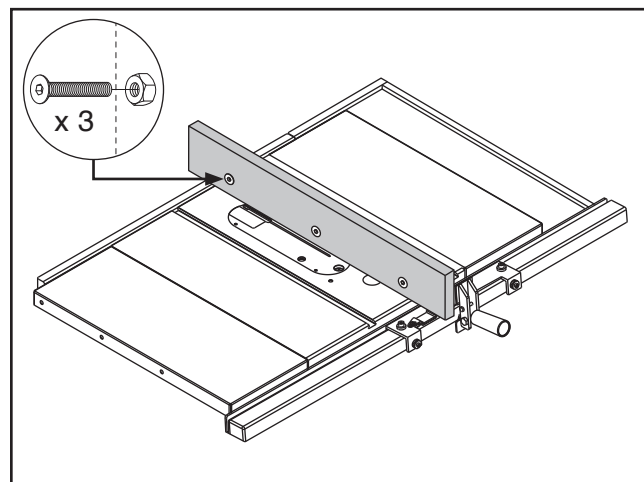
Auxiliary fence mounts on upper or lower T-slots of fence face.
